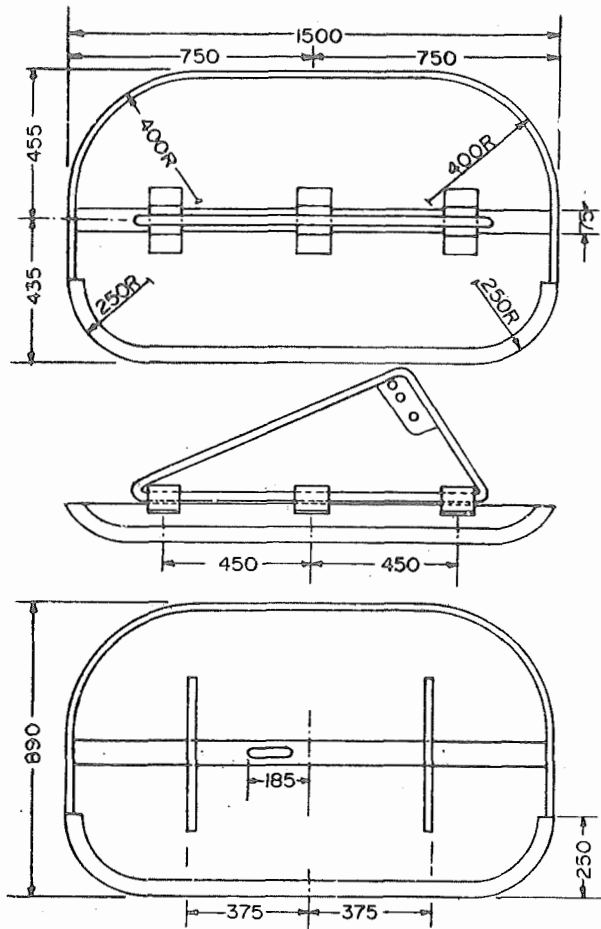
Design details of 1500 x 890 'v' shaped otter board (measurements in mm)
